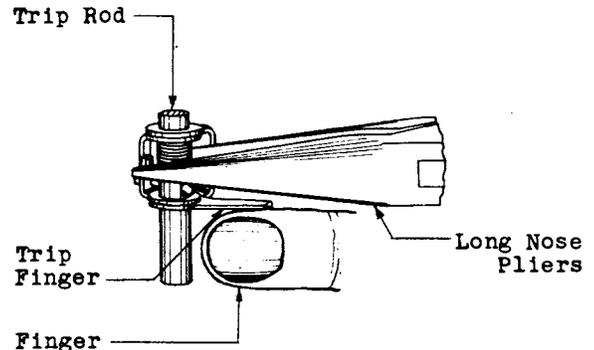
Method of Adjusting Trip Finger Back Stops
